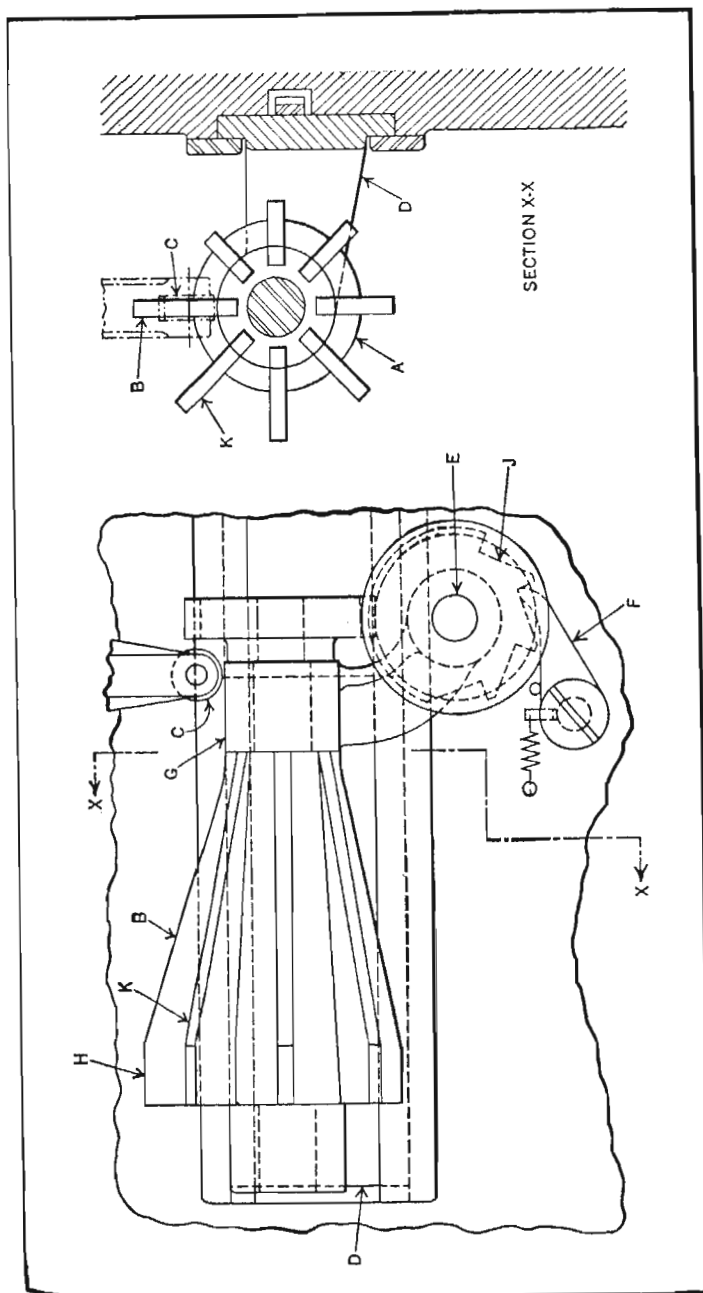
Sliding Cam which is Indexed after Each Stroke to Present a Different Cam Edge to the Follower, thus Varying the Follower Stroke
